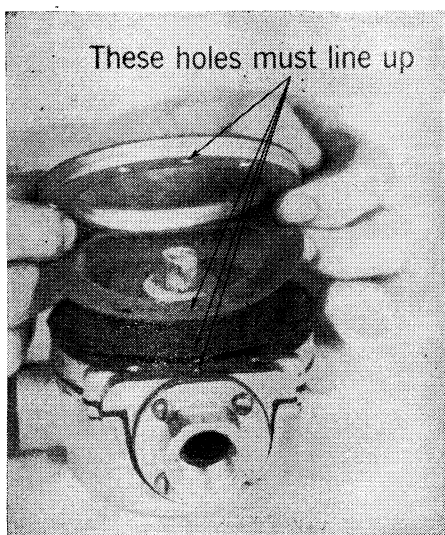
Removing control valve cover, spacer ring and diaphragm
